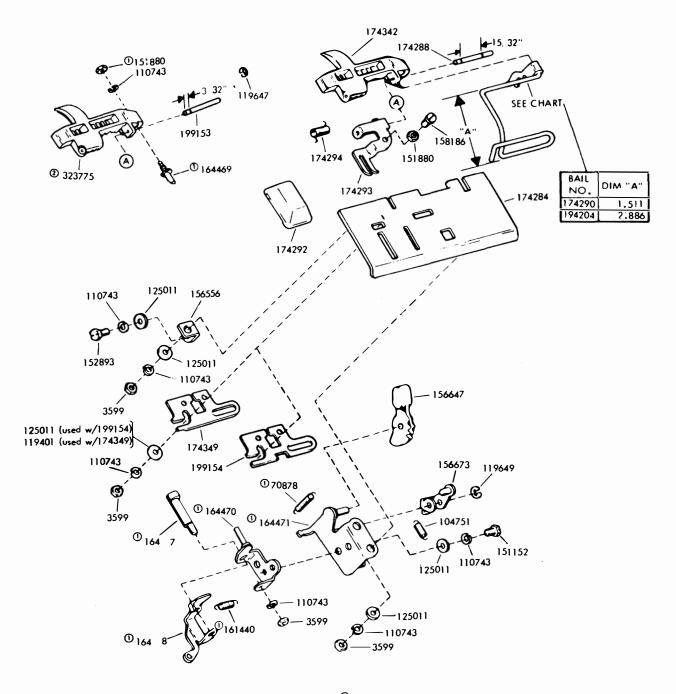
Tape Guide Plate Mechanisms (Sheet 1 of 3)
